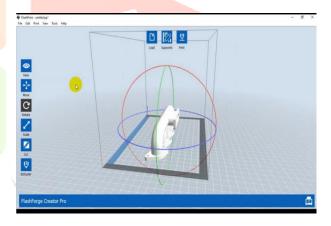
Exhaust Manifold Body Placed on the Platform
